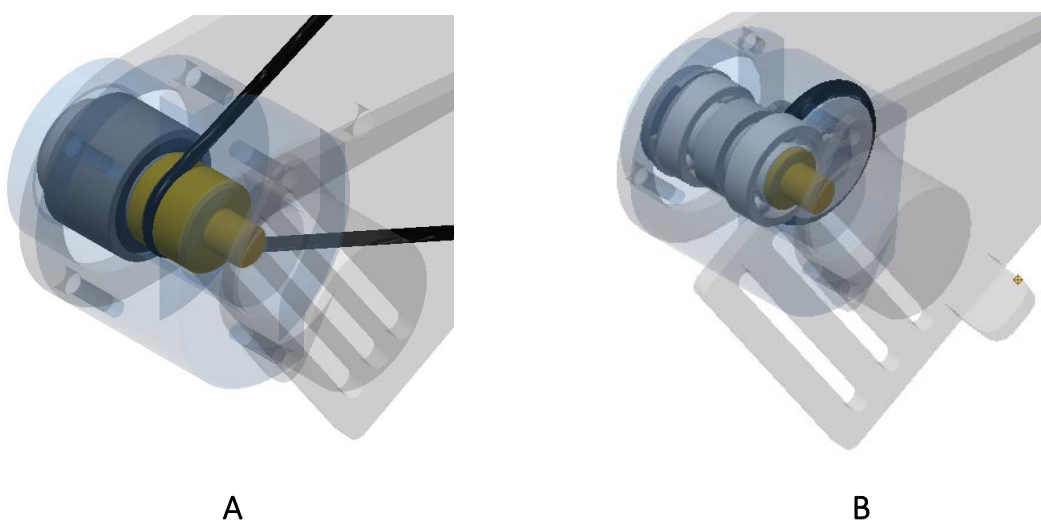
Two different solutions for the integration of the misaligned encoder with the plate of the pelvis belt: one double row deep groove ball bearing (A) and two single row deep groove ball bearings (B).
